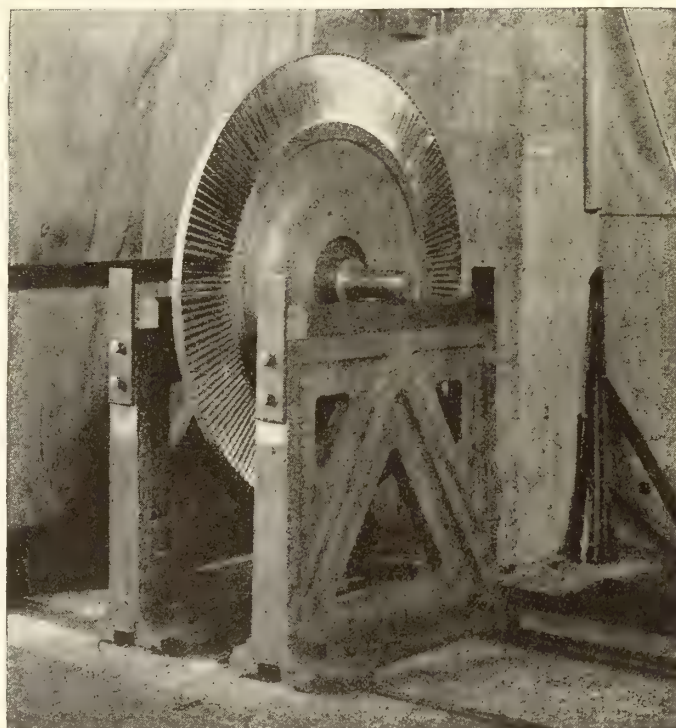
Low-pressure Wheel of 2,100 h.p. Steam-turbine on static Balancing-wheel.
